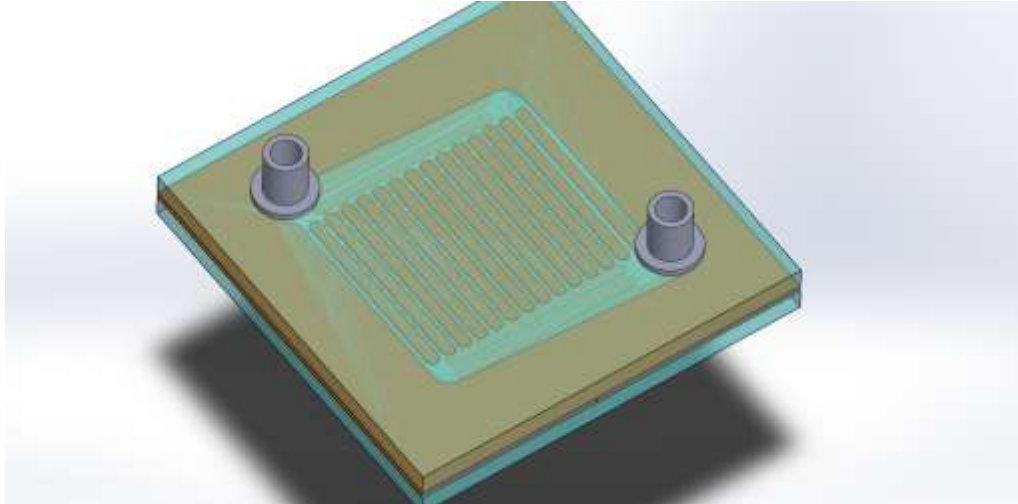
SolidWorks model of assembled crossflow heat exchanger fabricated by xurography.
